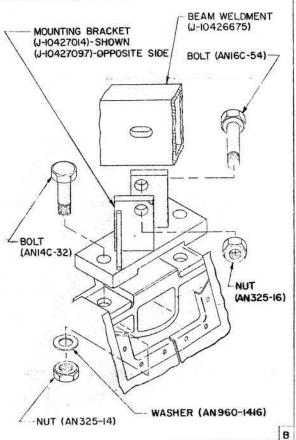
INSTALLATION OF BEAM WELDMENT AND FOWARD SLING ASSEMBLIES
